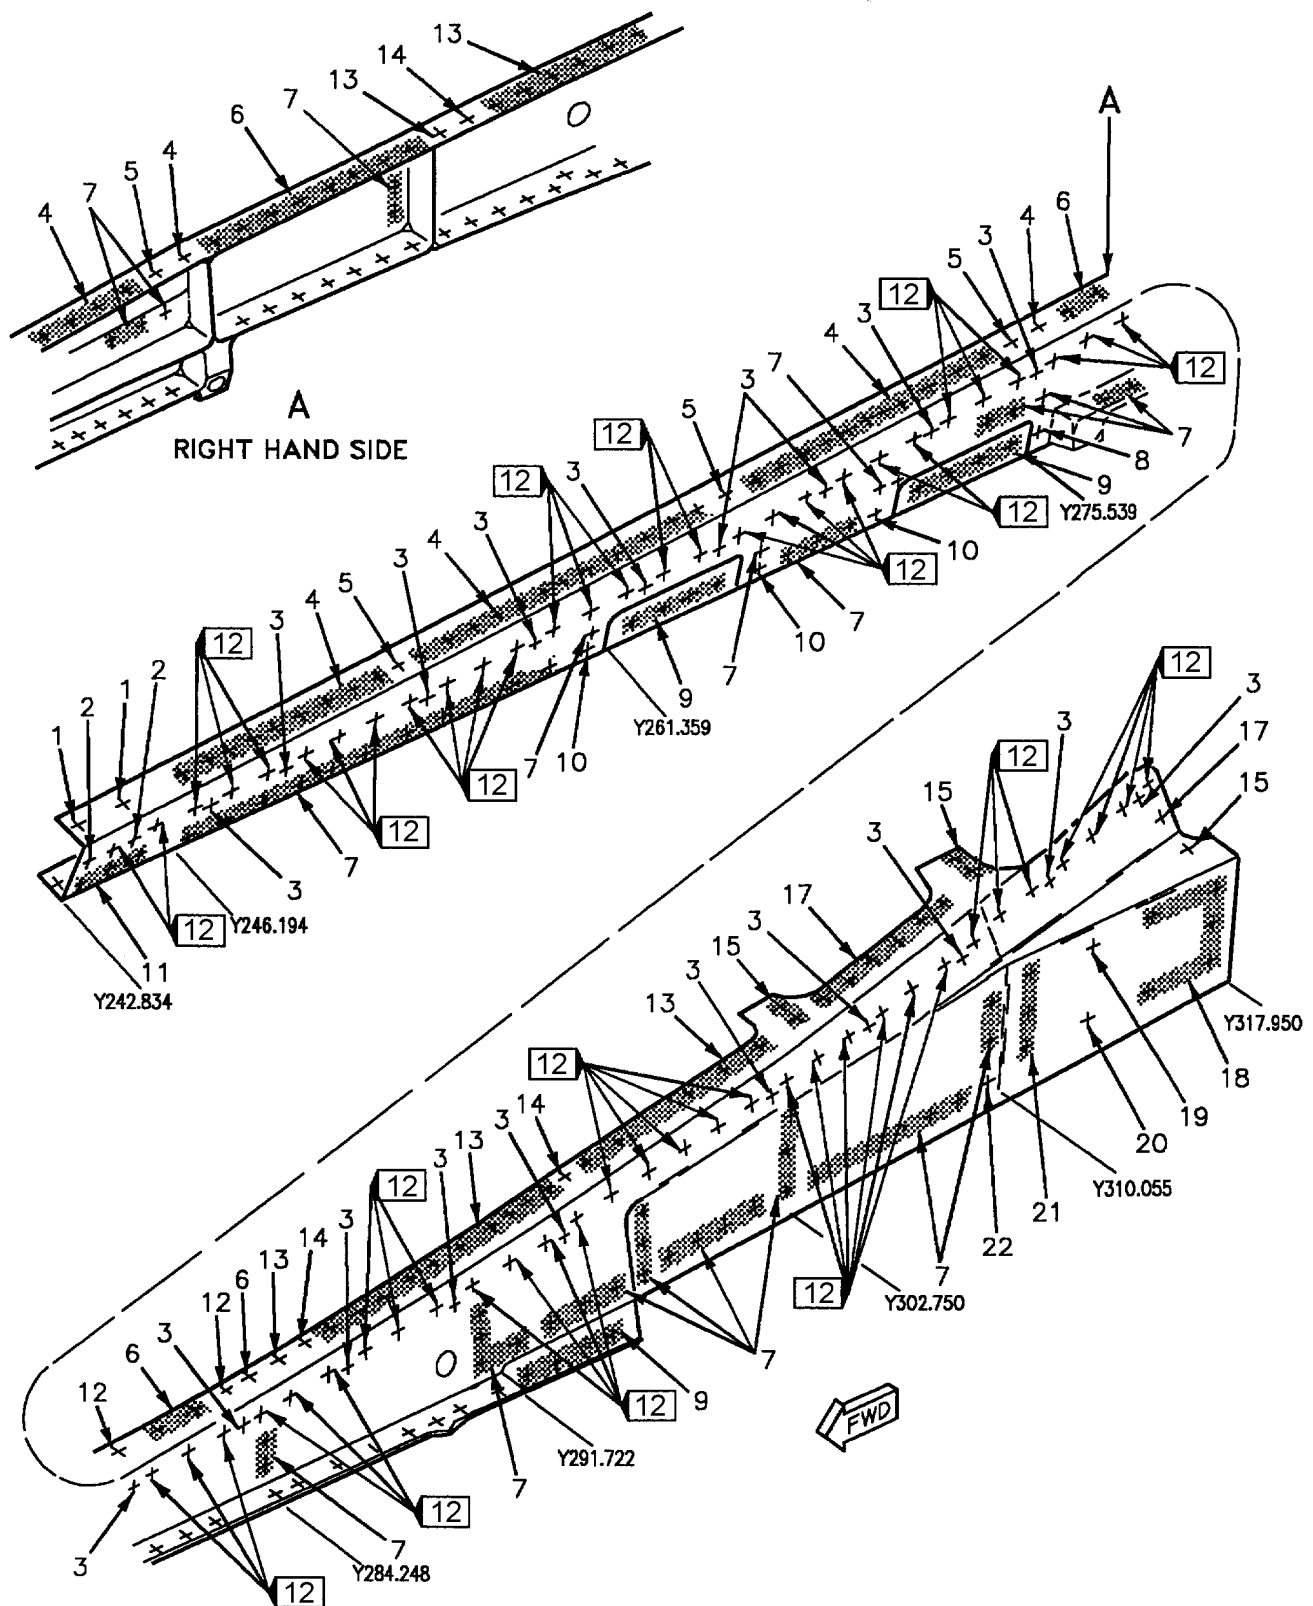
Side Frame, 74A350714, Fastener Index (Sheet 1)
